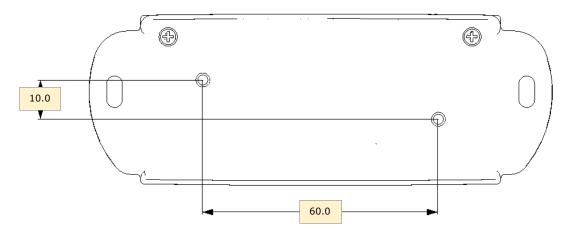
LDSBUS Thermocouple Sensor Adapter Dimension - Bottom View
